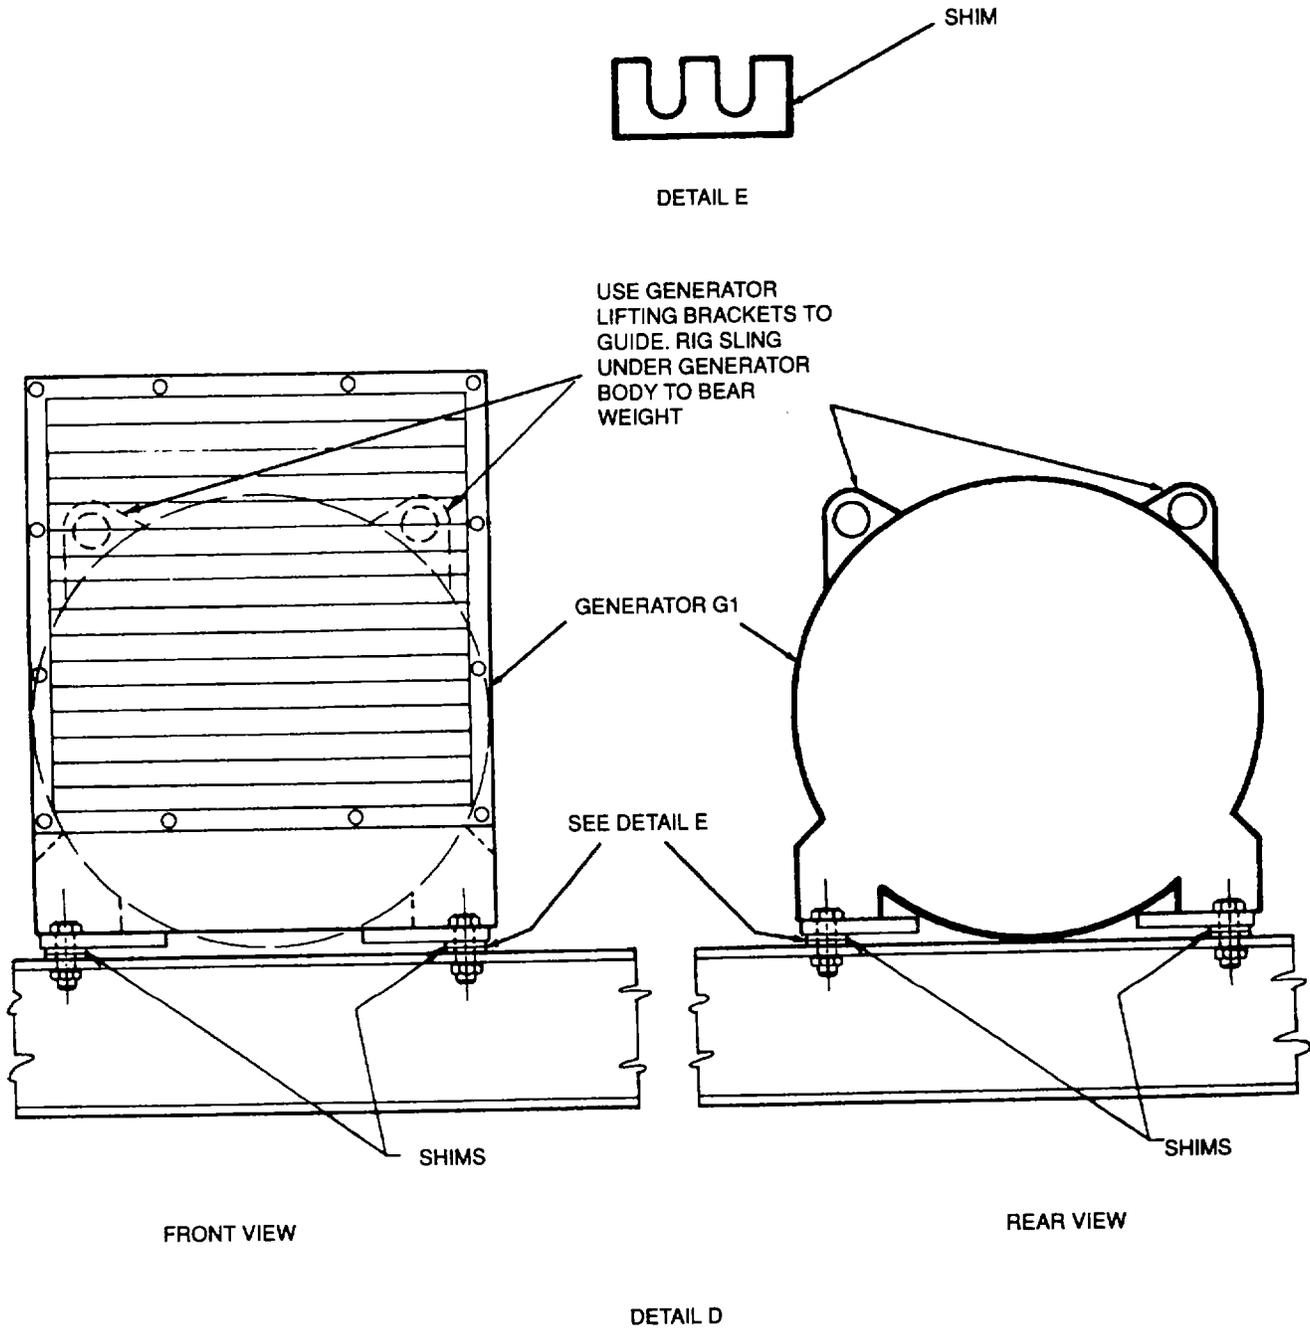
Engine and Generator G1, Removal, Installation, and Alignment (Sheet 4 of 4)
